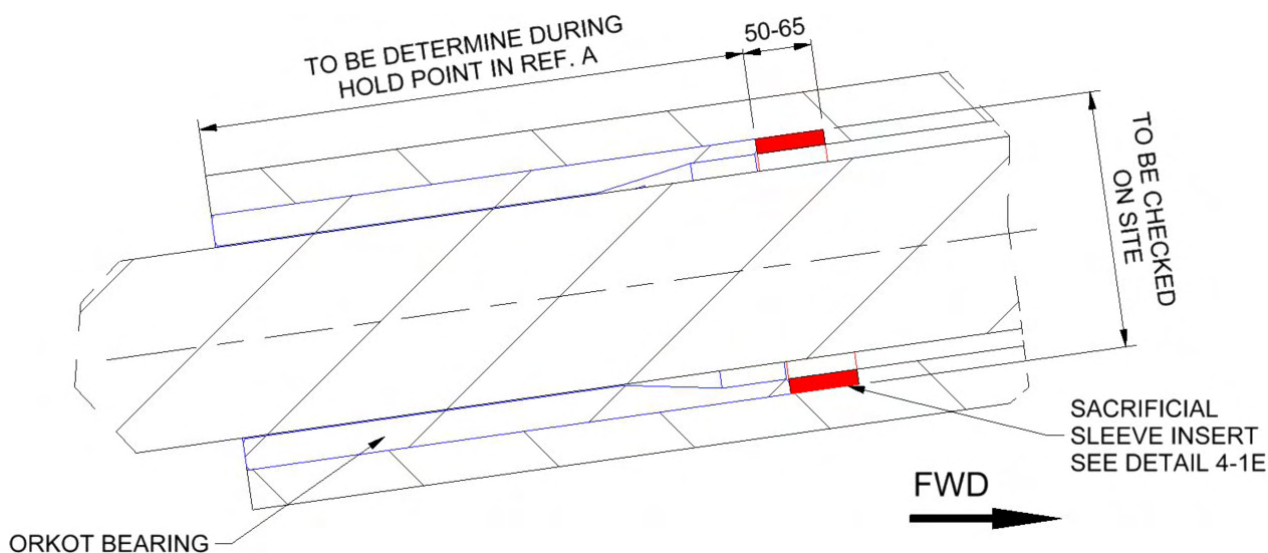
Mid bearing configuration with aluminium sleeve insert shown red
